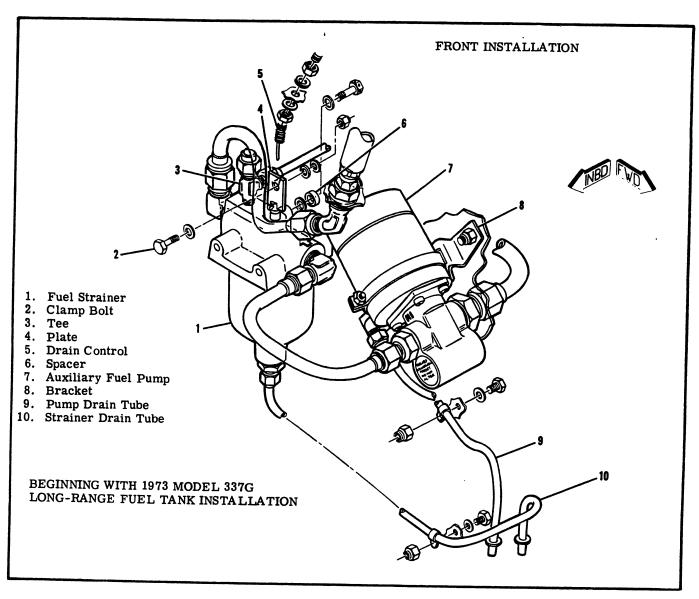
Auxiliary Fuel Pump Installation (Sheet 2 of 3)
